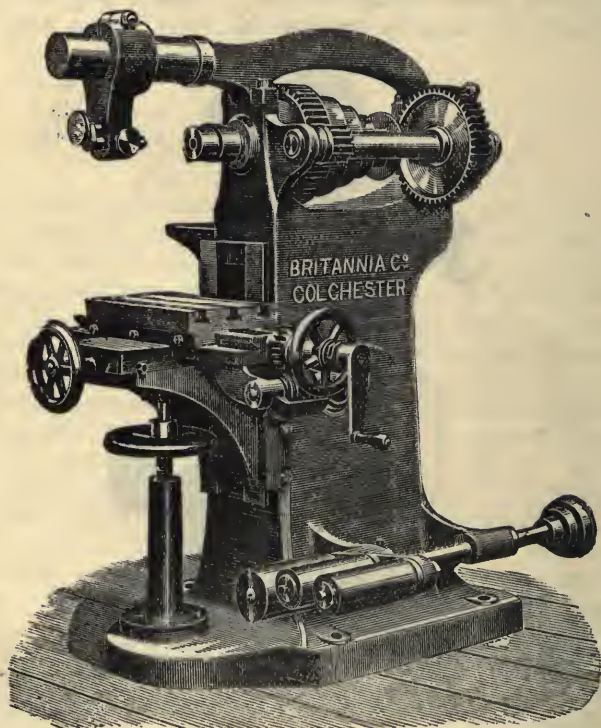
DOUBLE-GEARED MILLING MACHINE.
